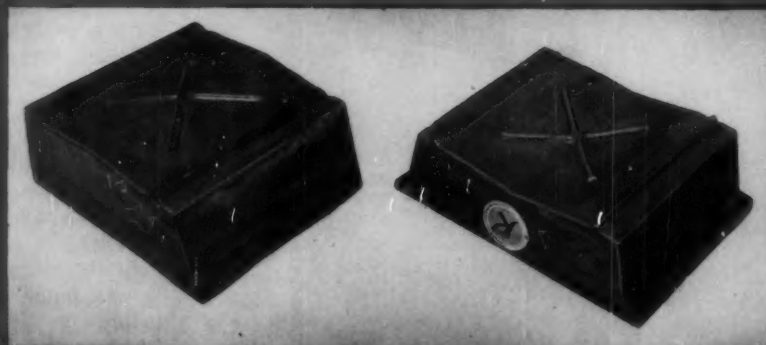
Drop hammer die produced by this method has stamped out 3500 parts
